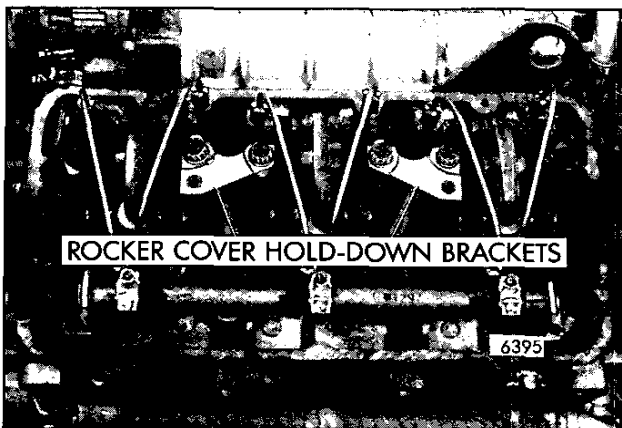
Rocker Cover Hold-Down Brackets Mounted on Rocker Arm Shaft Brackets
